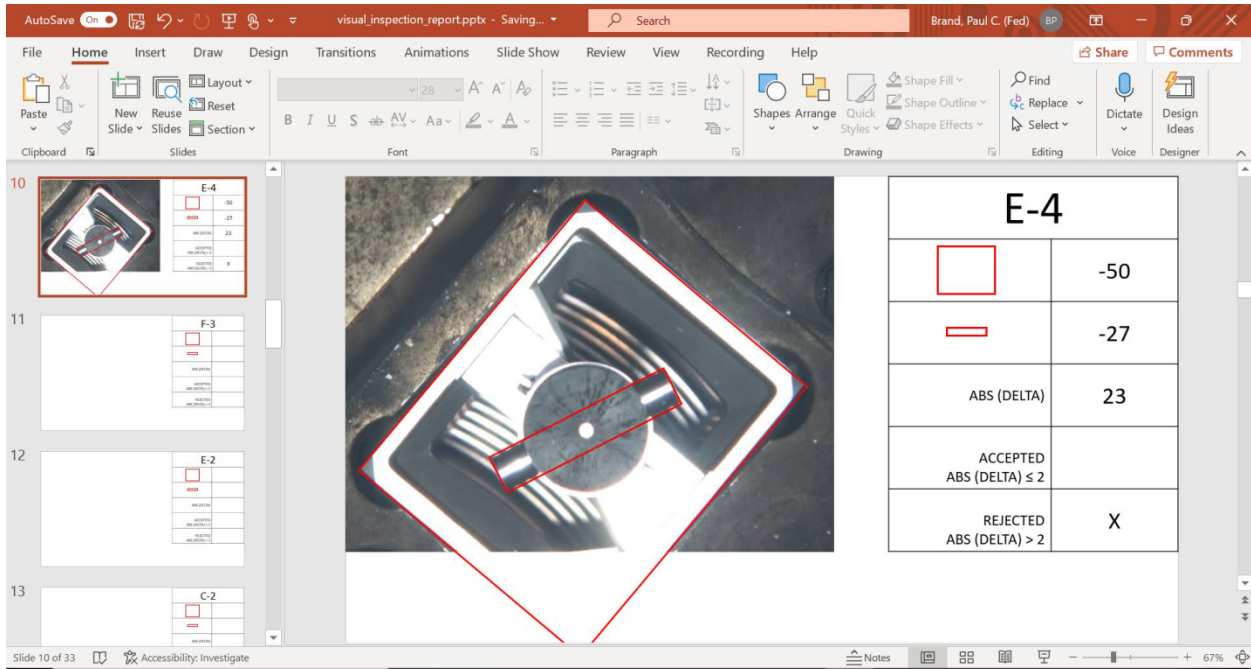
"Completed Sheet for Fuel Head Visual Inspection Analysis – Rejected,"
